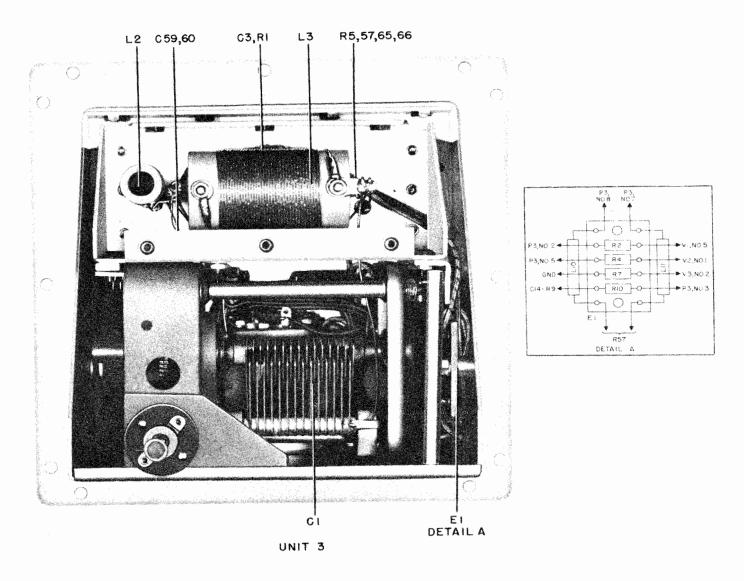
13. Radio Frequency Oscillator O—165/UR, Inner Oven, Covers Removed
